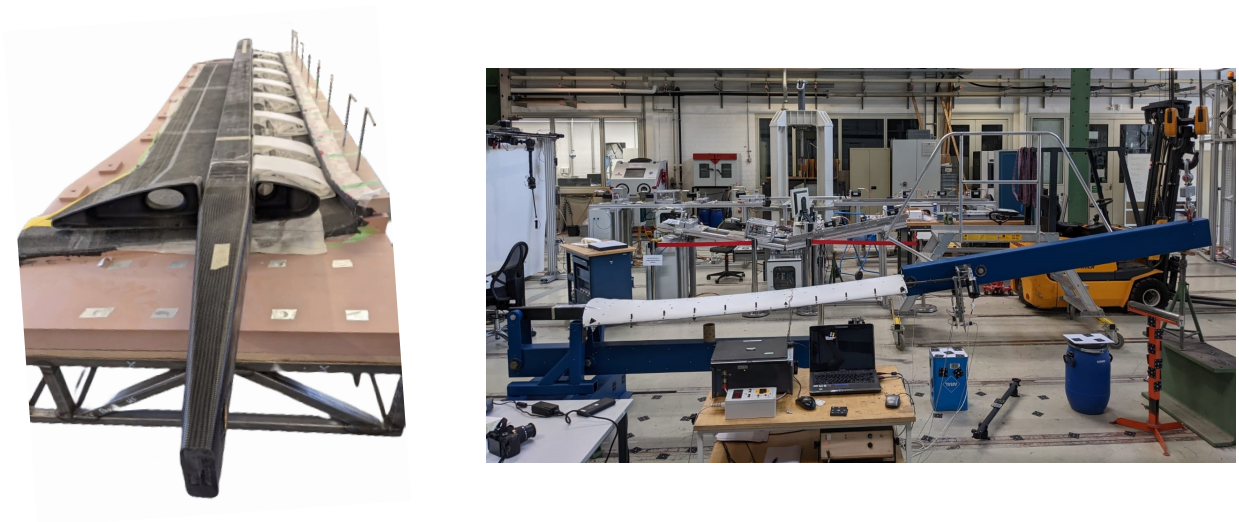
Morphing wing demonstrator in bottom side mold with stacked compliant mechanism ribs and primary structure (left). Demonstrator during wing bending test (right)
